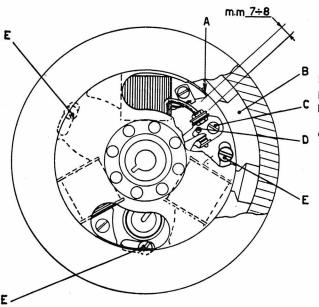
Inspection port in flywheel (rotor) permits access to screw (C) to adjust breaker contacts and time the ignition.
